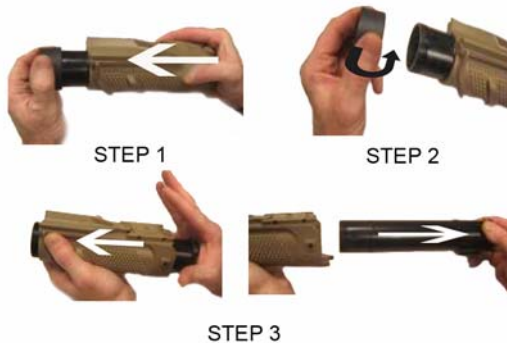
Disassemble MK 13 MOD 0 Barrel and Handguard Assembly.
